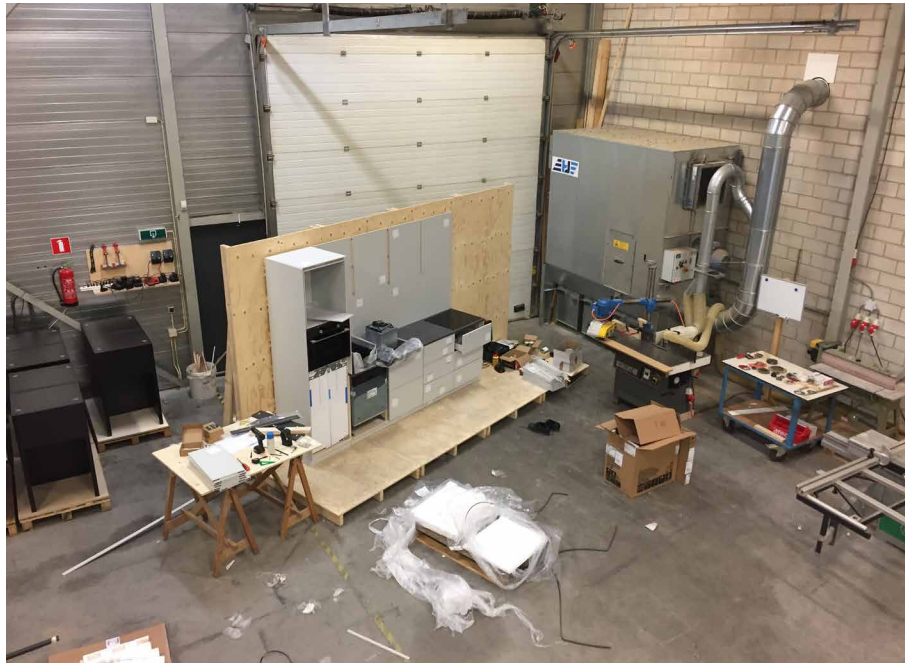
CIK prototype 1 being assembled with a grey style package
